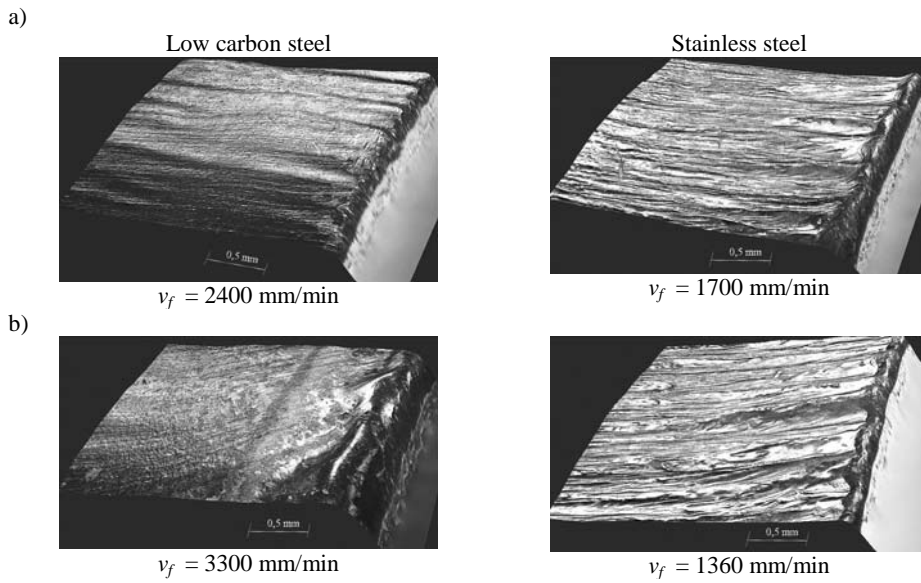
Microscope pictures of workpiece's surface after laser cutting in the place marked by letter "E", see Fig. 5a, for the case of: a) minimum, b) maximum values of the angle between formed surface and the surface layer of the workpiece
